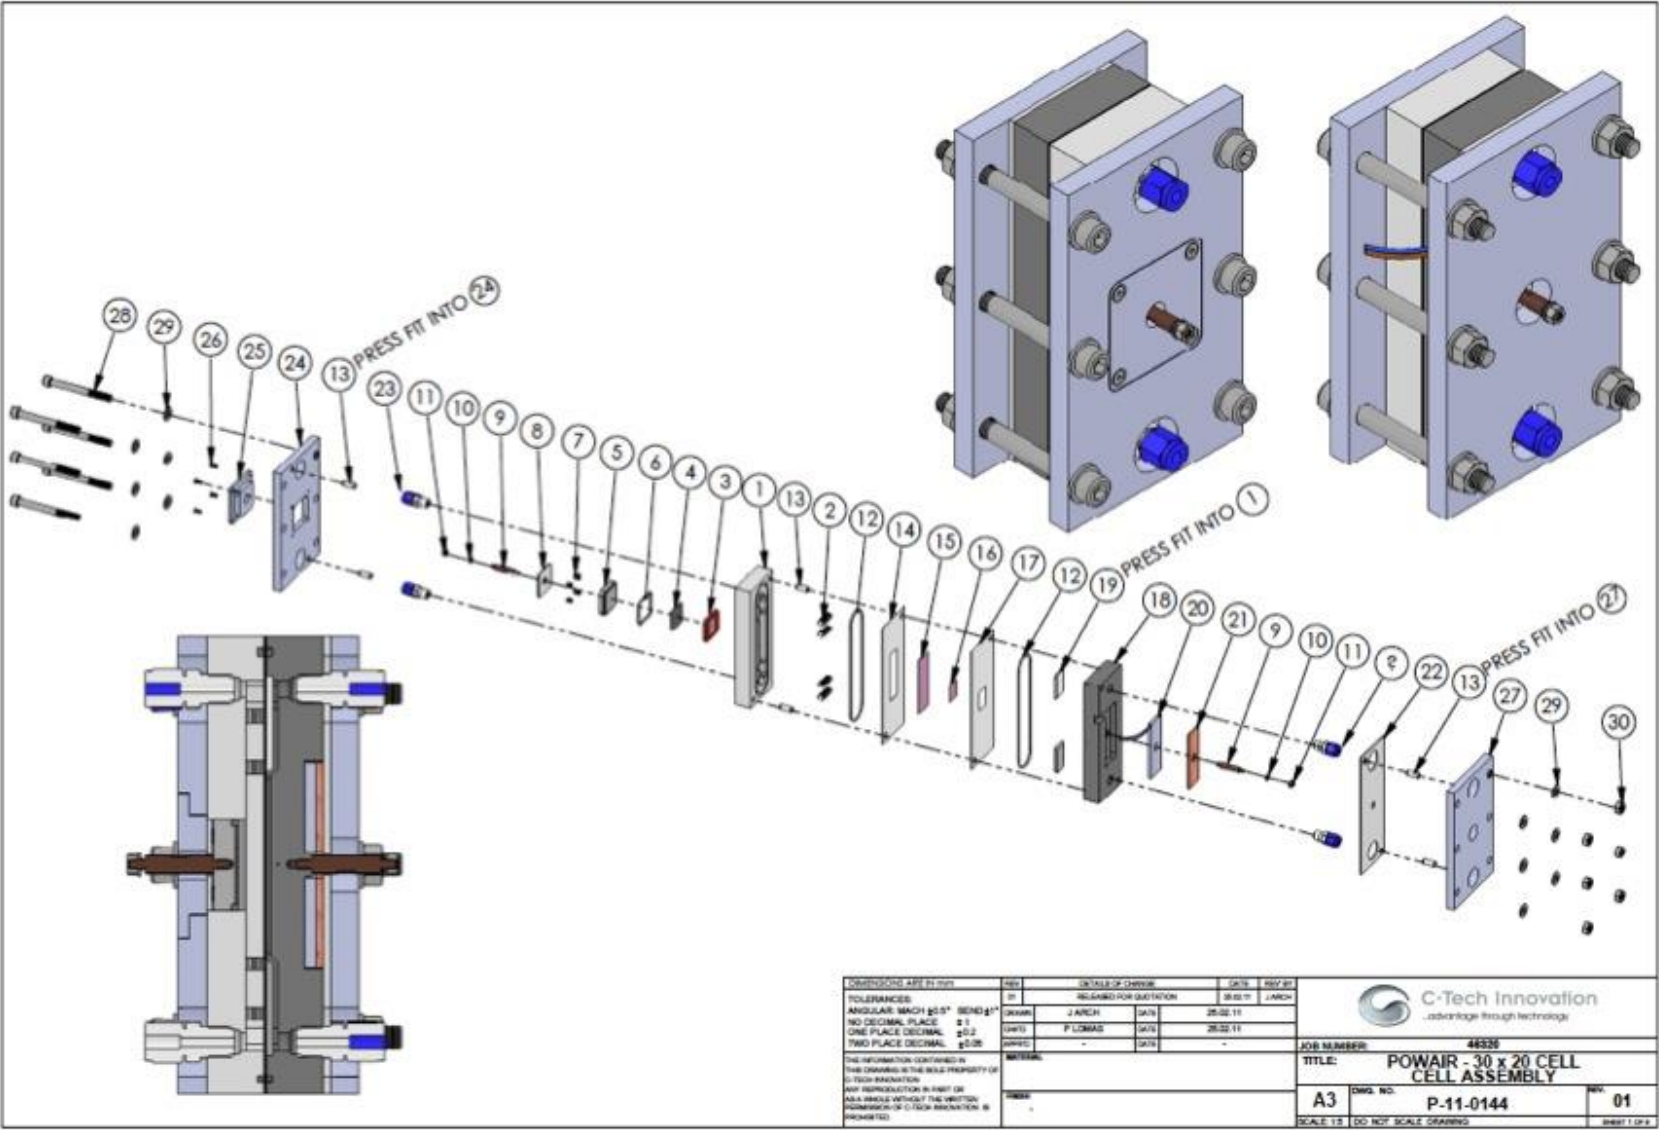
CAD drawings showing a) isometric views of the front and rear of the cell b) a cross-sectional view c) exploded view of the individual cell components 1-30.
